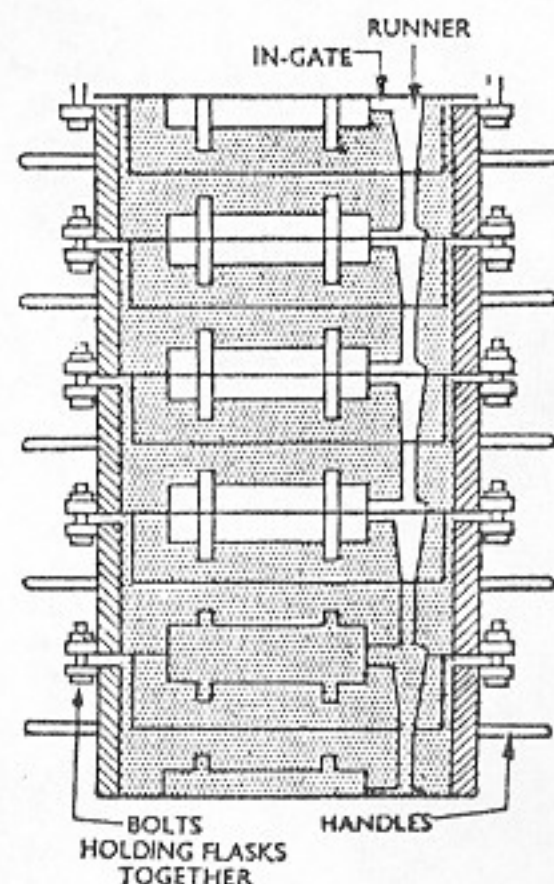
Special machines are sometimes employed which mold two halves of a mold, half on each side of a half box. The boxes are then stacked on each other, a complete mold being formed at each joint, and the stack is poured through a single runner. The diagram illustrates the principle of this system.
